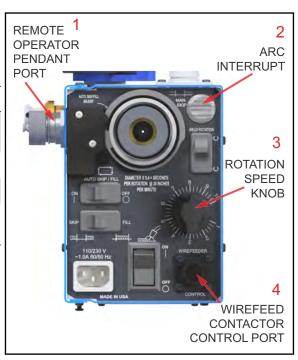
CONTROLS FOR CHECKING THE STEP SETTING
